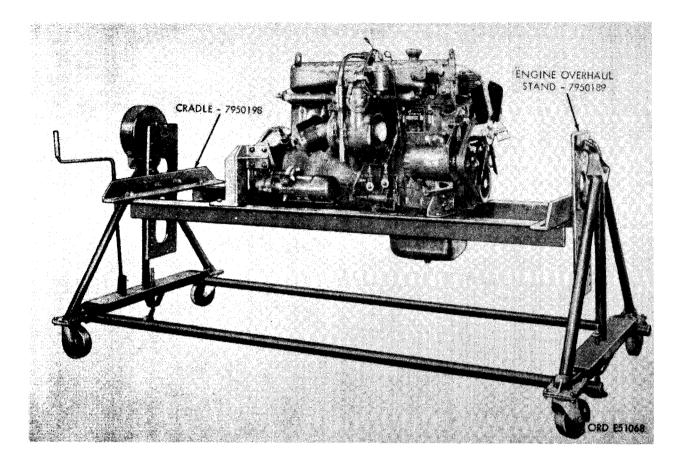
ENGINE ASSEMBLY MOUNTED ON ENGINE OVERHAUL STAND.
